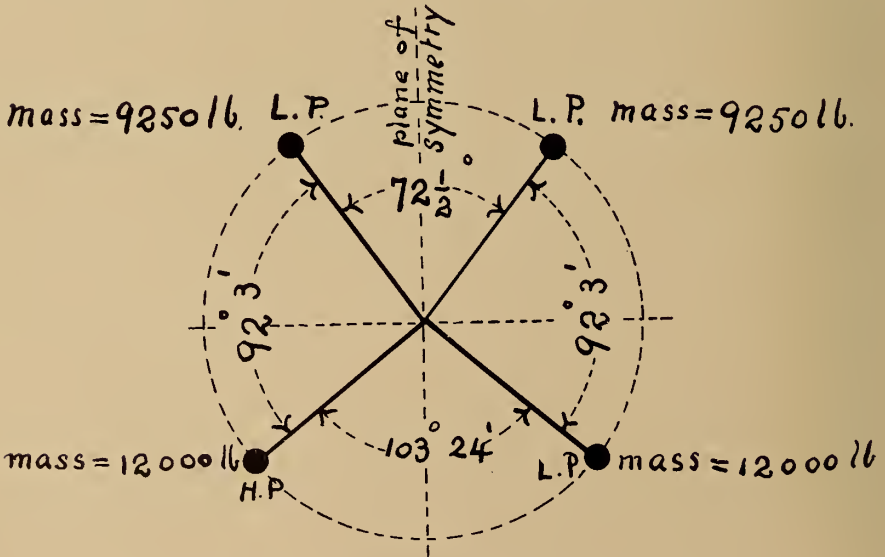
END VIEW OF BALANCED CRANK SHAFT, SHOWING CRANK ANGLES
